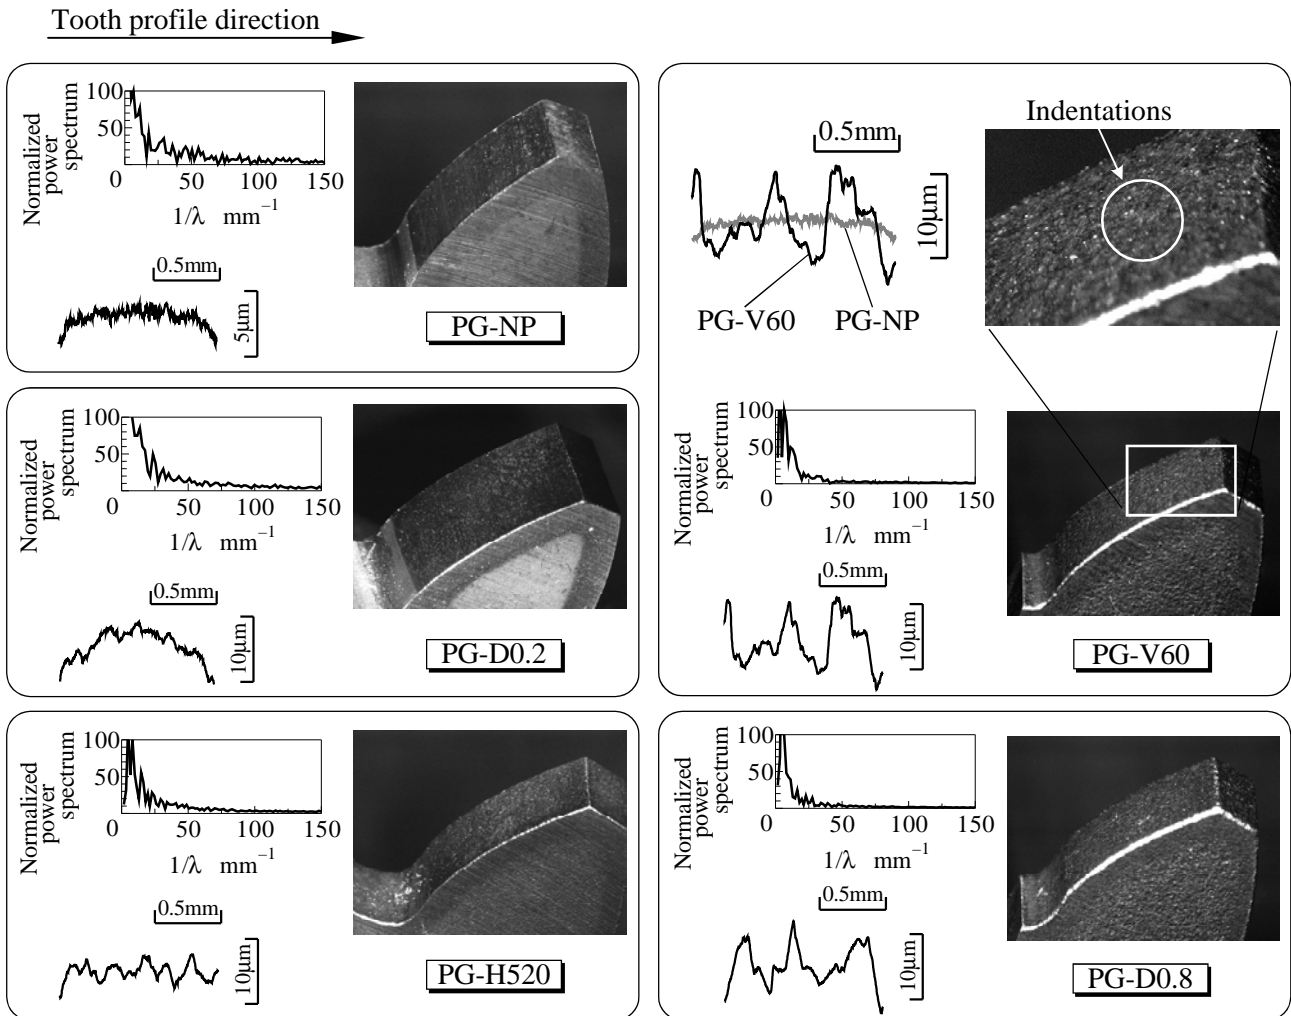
Tooth surface photographs and roughness curves along tooth profile direction of sintered gears
